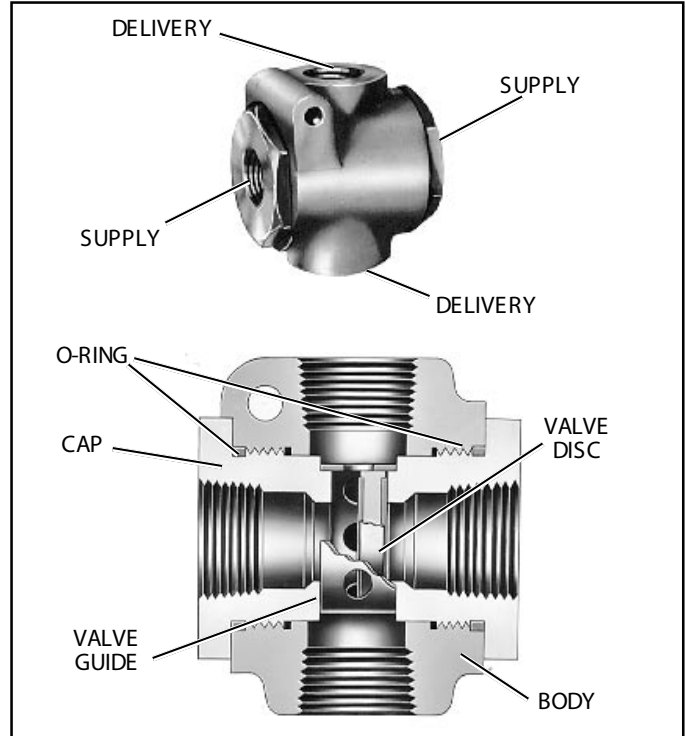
DOUBLE CHECK VALVE (DISC TYPE)
